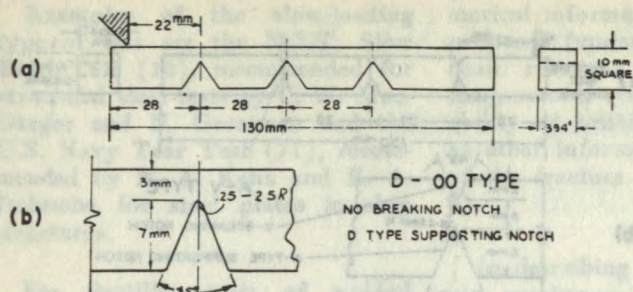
Details of Type "D" double-notched (V-V) impact samples, and supporting notch details (all types).
